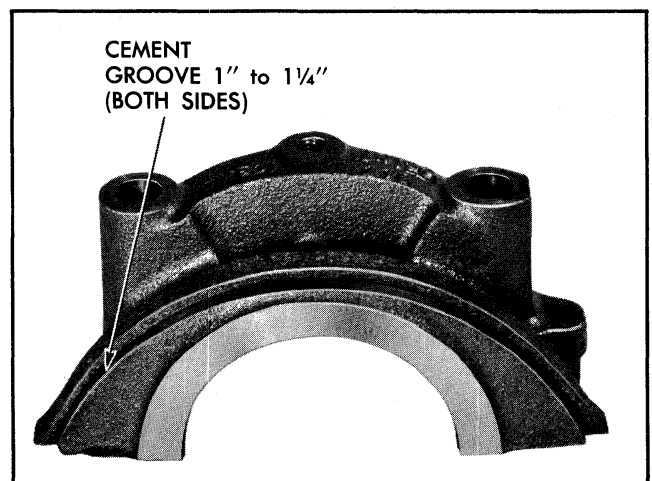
Rear Oil Pan Gasket Positioned in Bearing Cap
